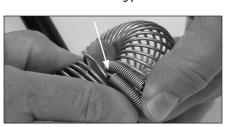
Insert end of Corona Ring into Inner Spring.
